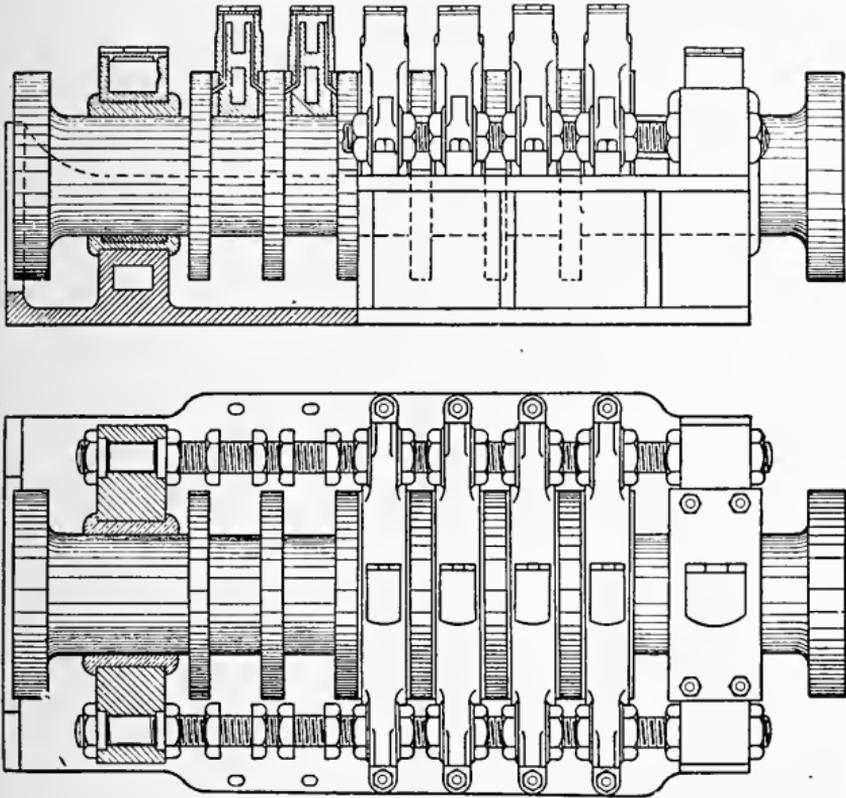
Type of Thrust Bearing in Which Provision Is Made for Taking Up Wear
